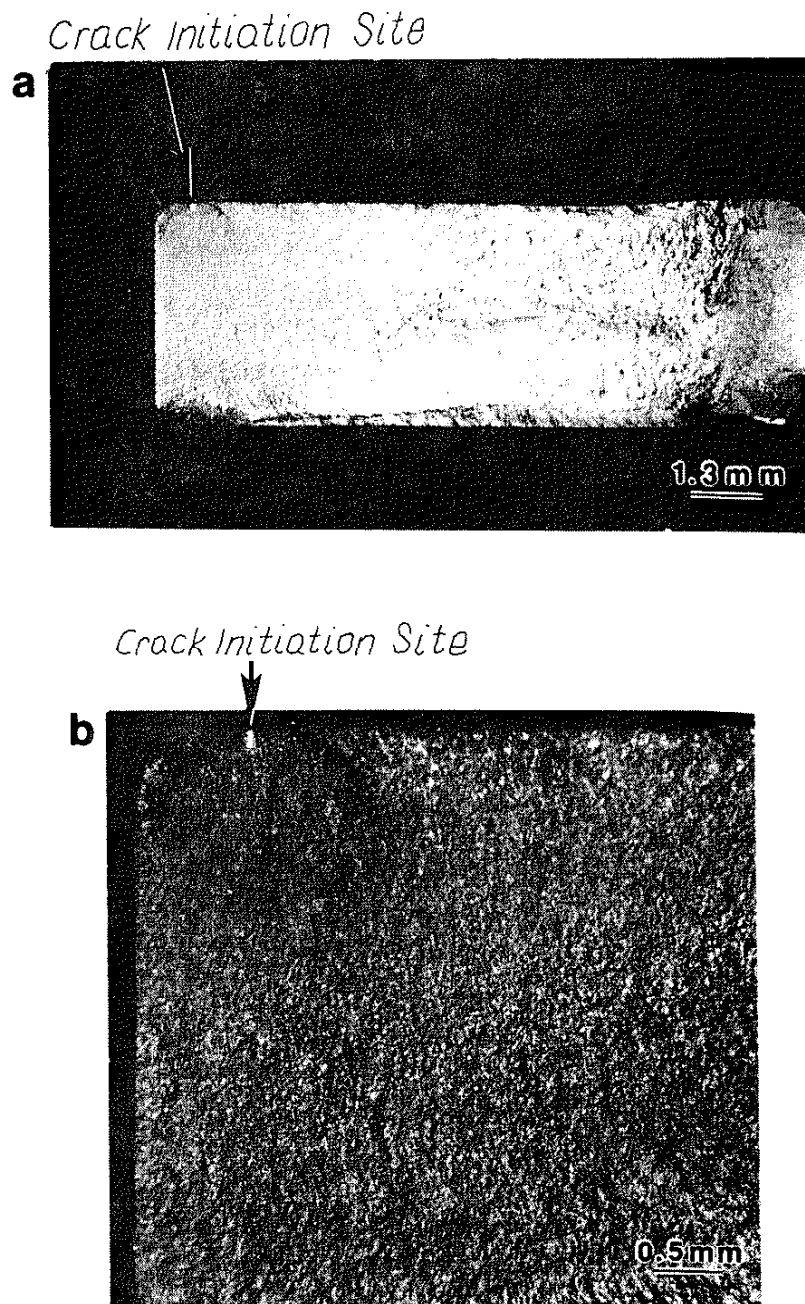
Fracture surface of welded and laser-dressed (LDA) 18 Ni (250) maraging steel after fatigue test: a) fatigue crack initiation site was at the new weld toe, b) Fracture surface of a) with higher magnification.
